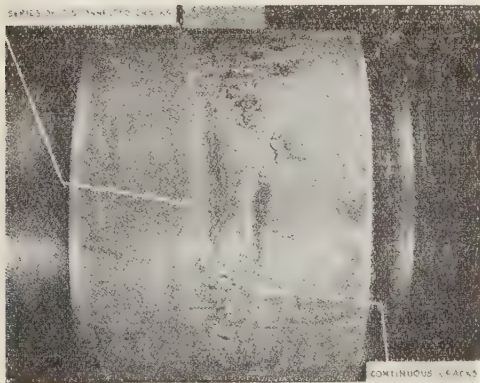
Fatigue cracks developed in the wheel seat of rolled axle No. 9555.
